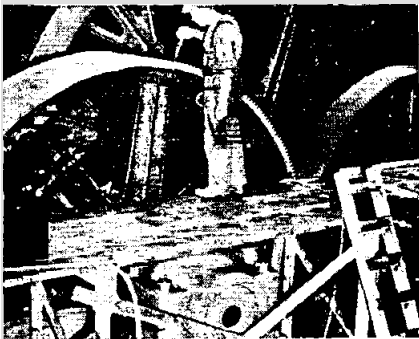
The air-hammer peening of large gears. Failure averted by hammer peening in place; mine-hoist gears 12 ft diameter by 30 in. wide. (Courtesy of J. O. Almen.)
